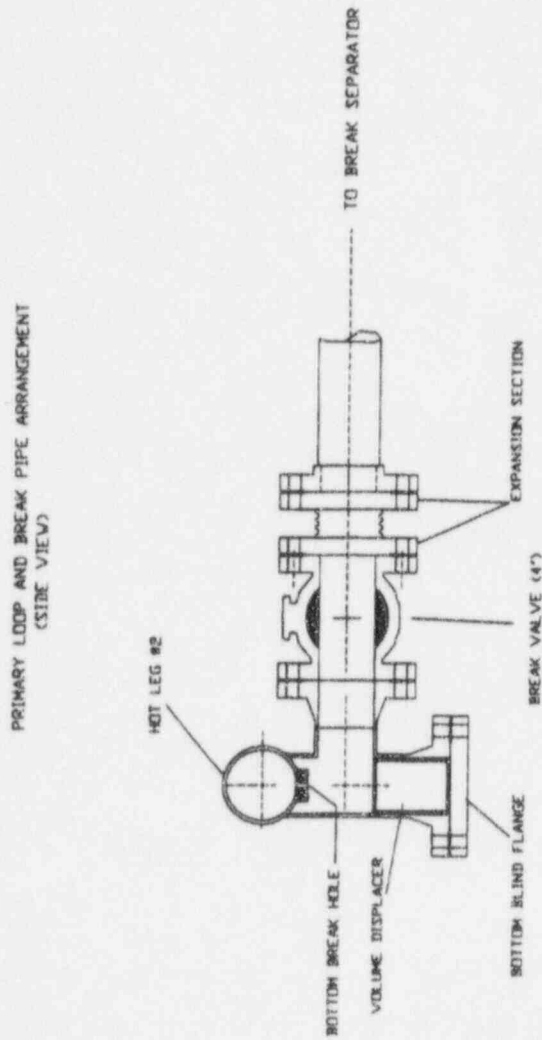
Primary Loop and Break Pipe Arrangement, Side View (Sh. 2 of 2)
